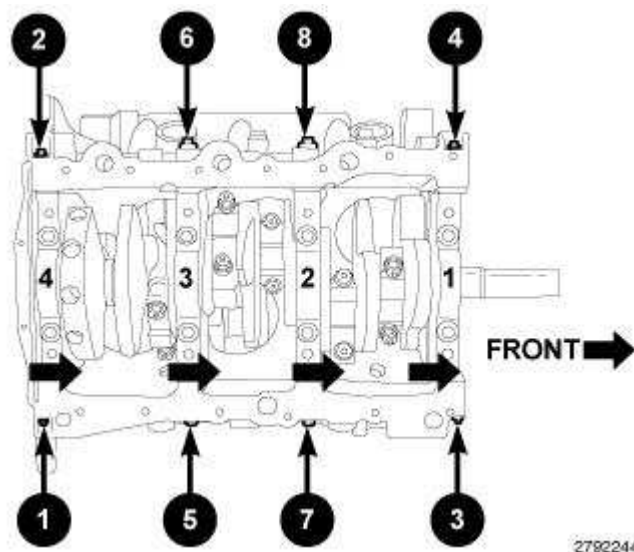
Main Bearing Tie Bolts Removal Sequence
